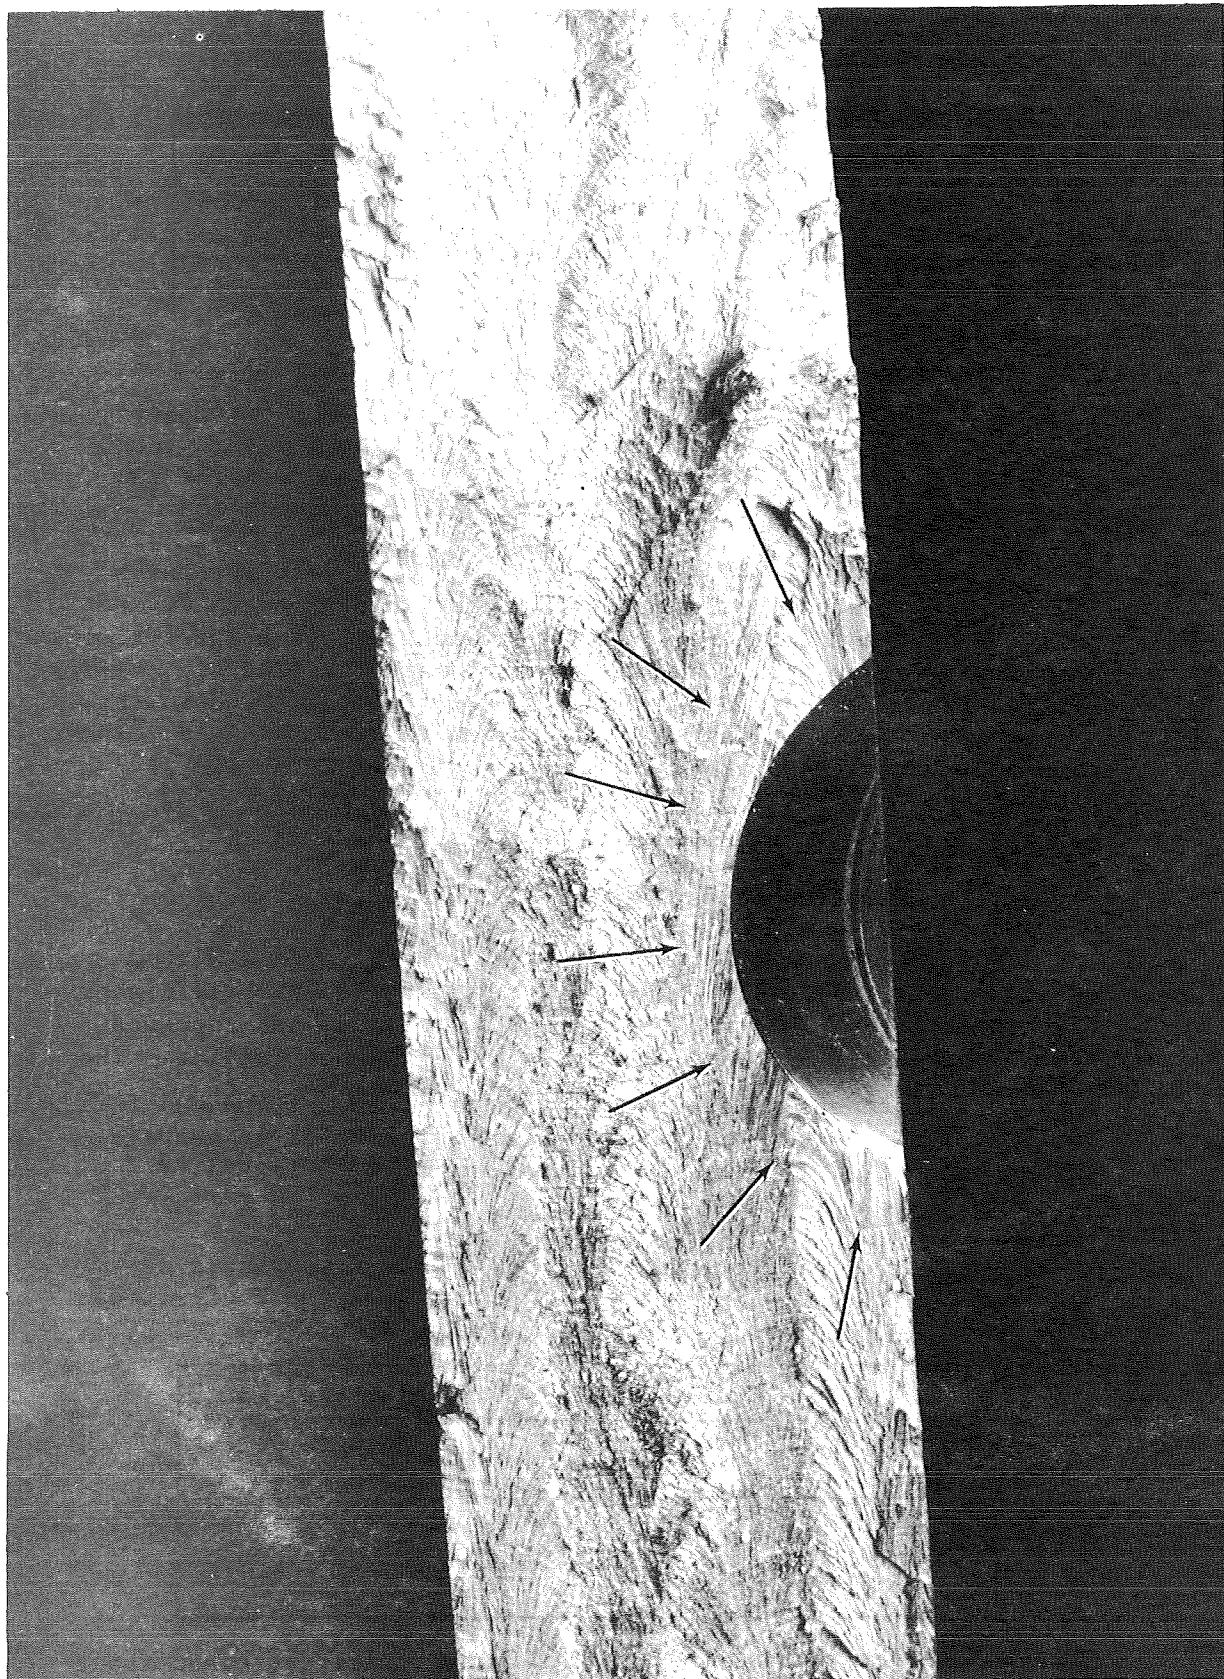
Fracture Face of Welded X7007-T6 Surface-Flawed Specimen
